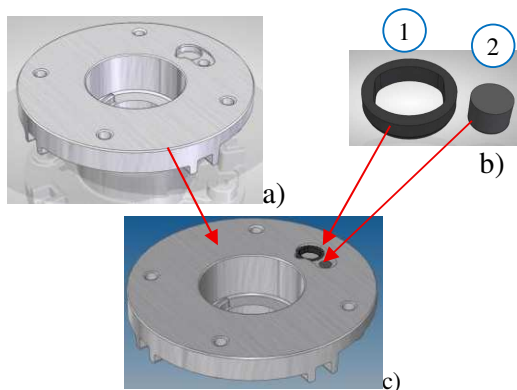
a) 3D model of the die-cast aluminium part; b) 3D models of the two metal inserts, bushing and pin; c) 3D model of the Disc Limiter product in isometric view [12]
